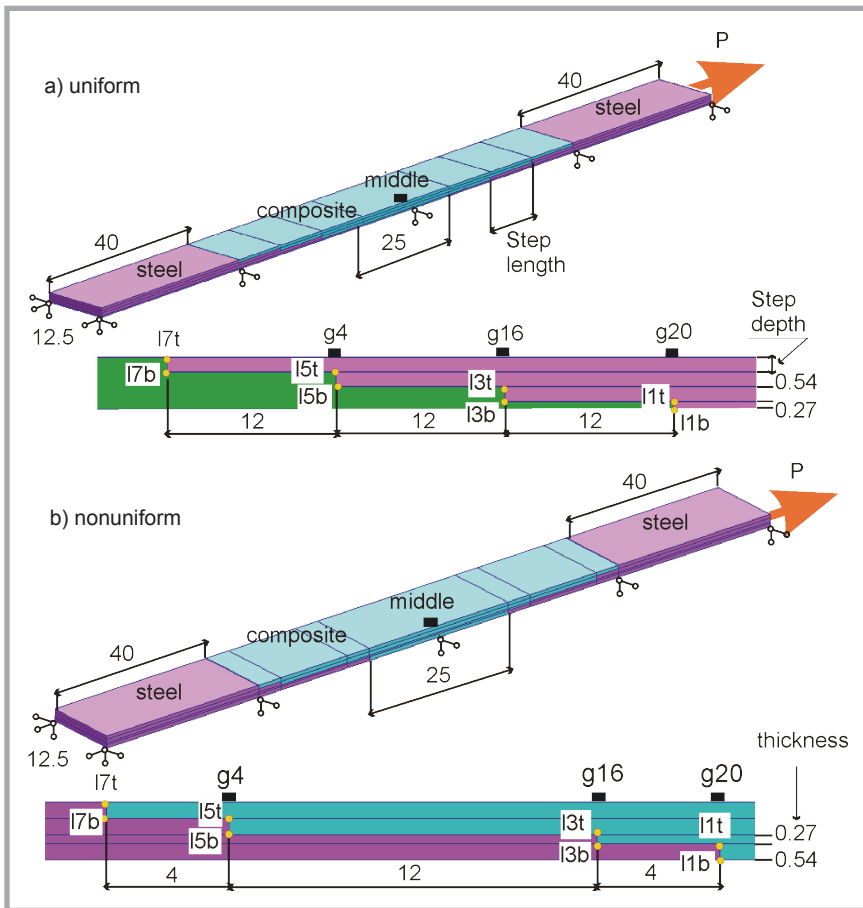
Overall dimension for uniform (a) and nonuniform (b) joint.
